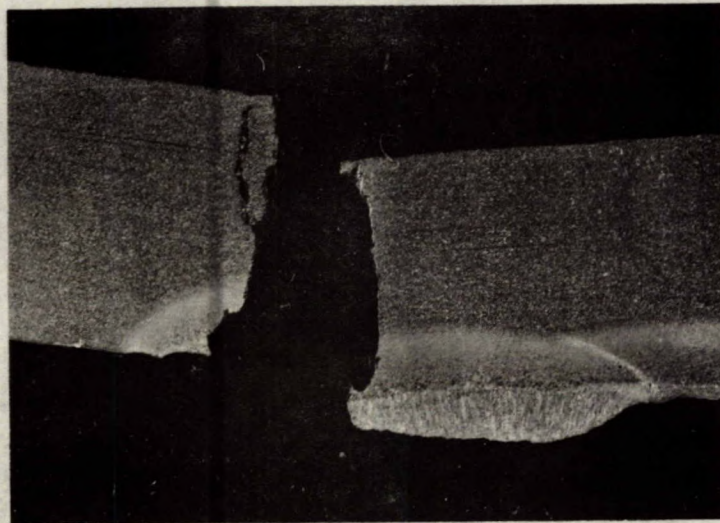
Section A4 (See Figures 3 and 6) showing that the lower fracture in channel A was at or very close to the toe of the fillet weld joining the connecting plate to the inner surface of channel A. The section was taken close to the termination of this weld.
